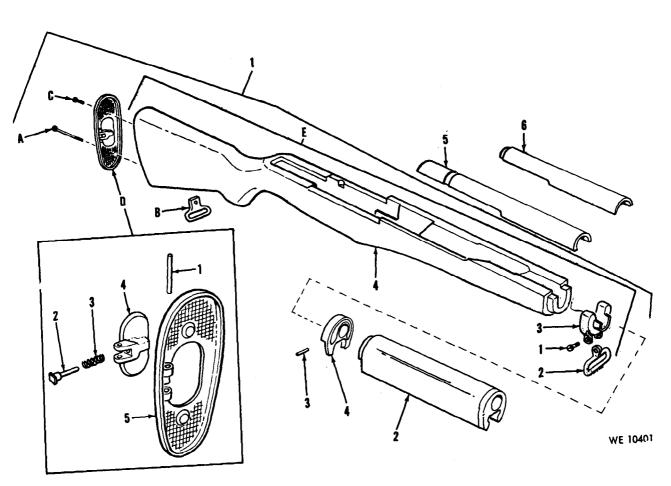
Stock assembly and gun hand guard group - exploded view.
